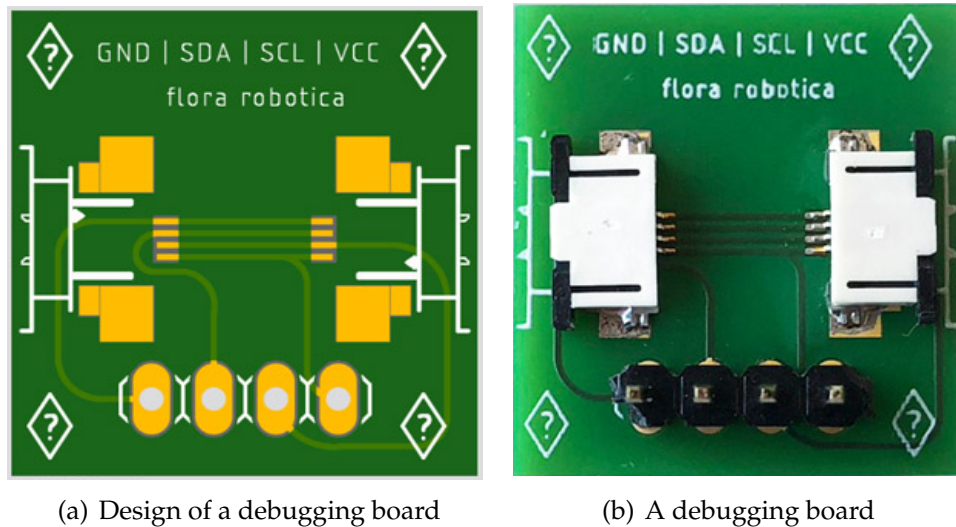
PCB design (a) and a fabricated debugging board (b).
